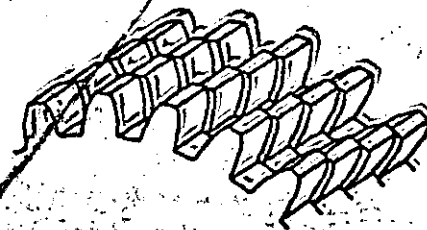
Stepped gears. Helical gears result if the plates are made progressively thinner.
